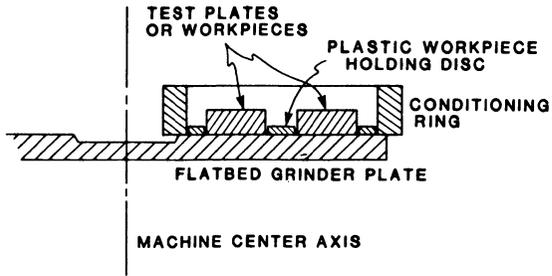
Position of grinder, rollers, conditioning ring, and holder with workpieces and testplates
